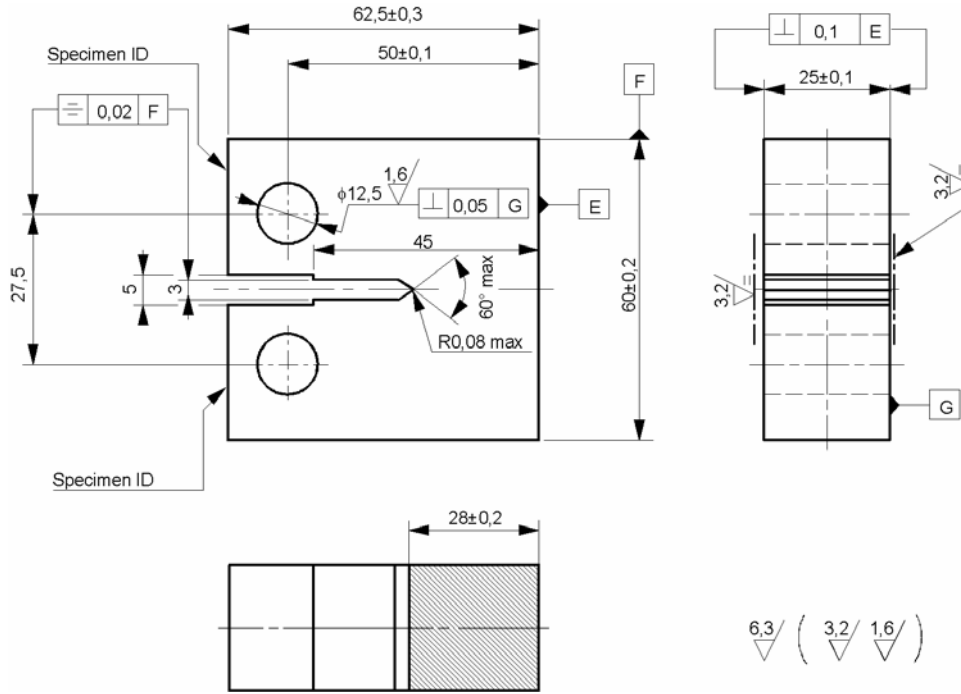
Main dimensions (in millimeters) and geometry of the C(T) specimen.
